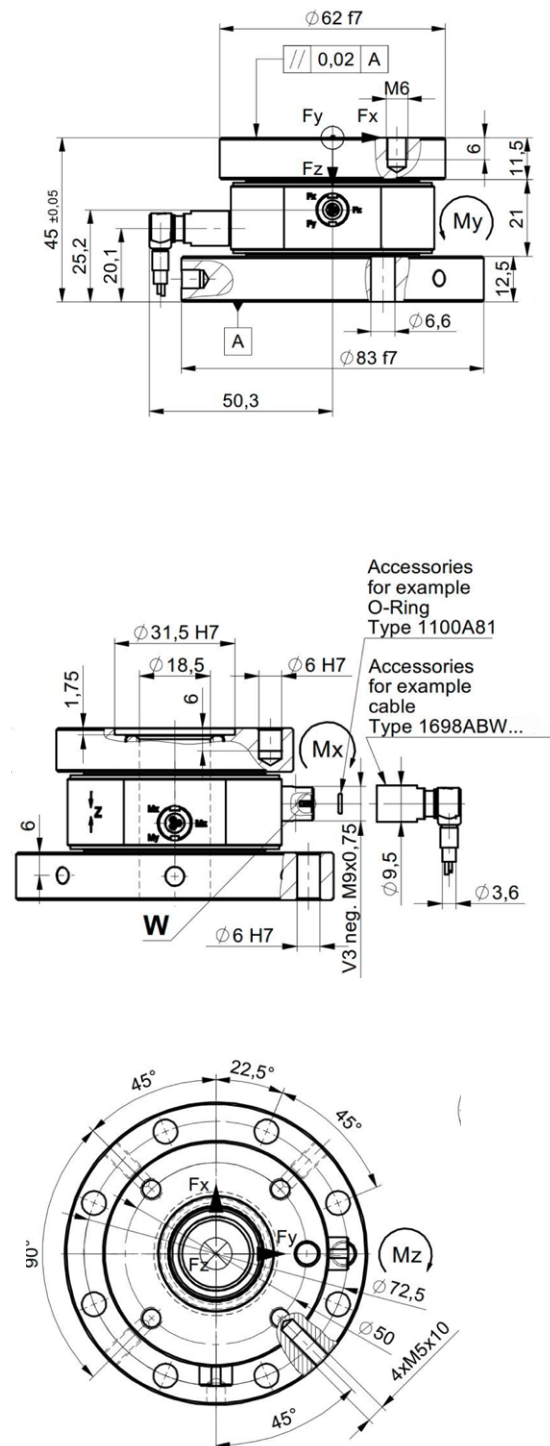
Dimensions of the 6-Axis Force/Moment Sensor Type 9306A31
